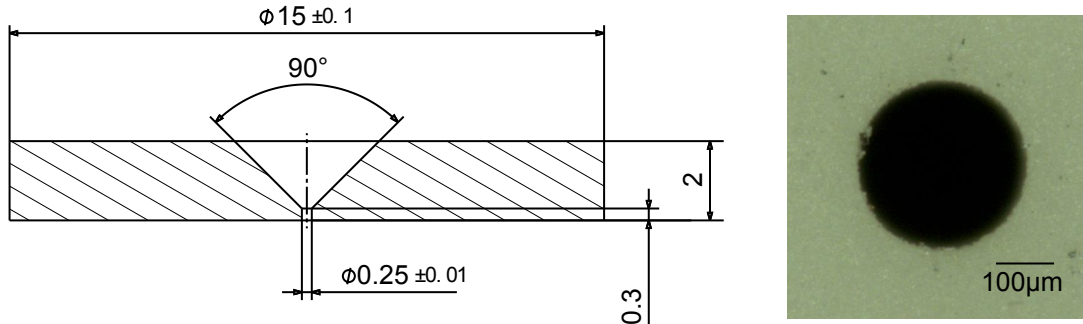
Drawing (left) and picture (right) of the nozzle plate. The picture shows the orifice on the bottom site after machining.
